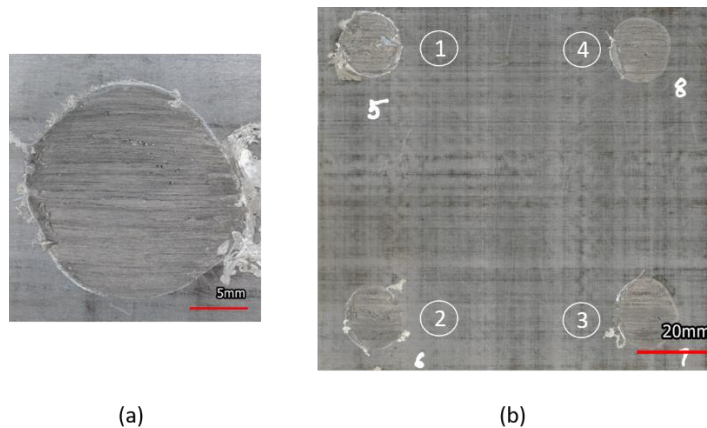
Representative weld fracture surfaces obtained after single lap shear testing in (a) single-spot configuration and (b) multi-spot configuration with weld sequence denoted as 1,2,3 and 4 respectively
